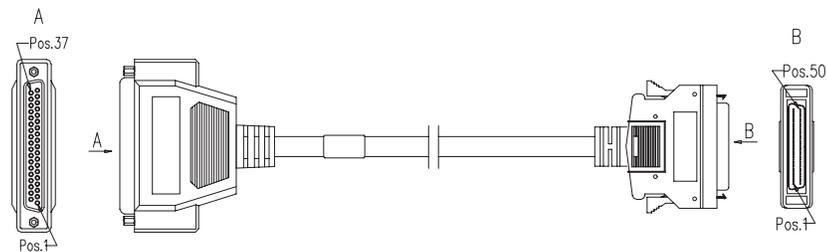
EIA/TIA-449 DCE Cable Assembly
